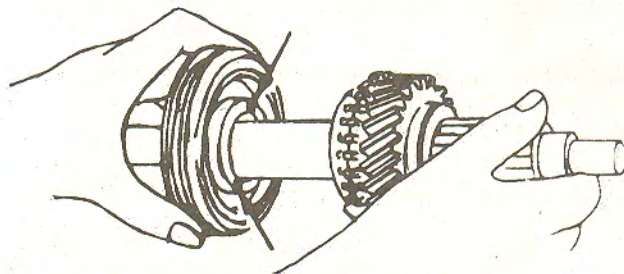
When fitting the synchroniser unit for the 1st and 2nd speeds, check that the oil grooves (arrows) are facing the gearwheel.
